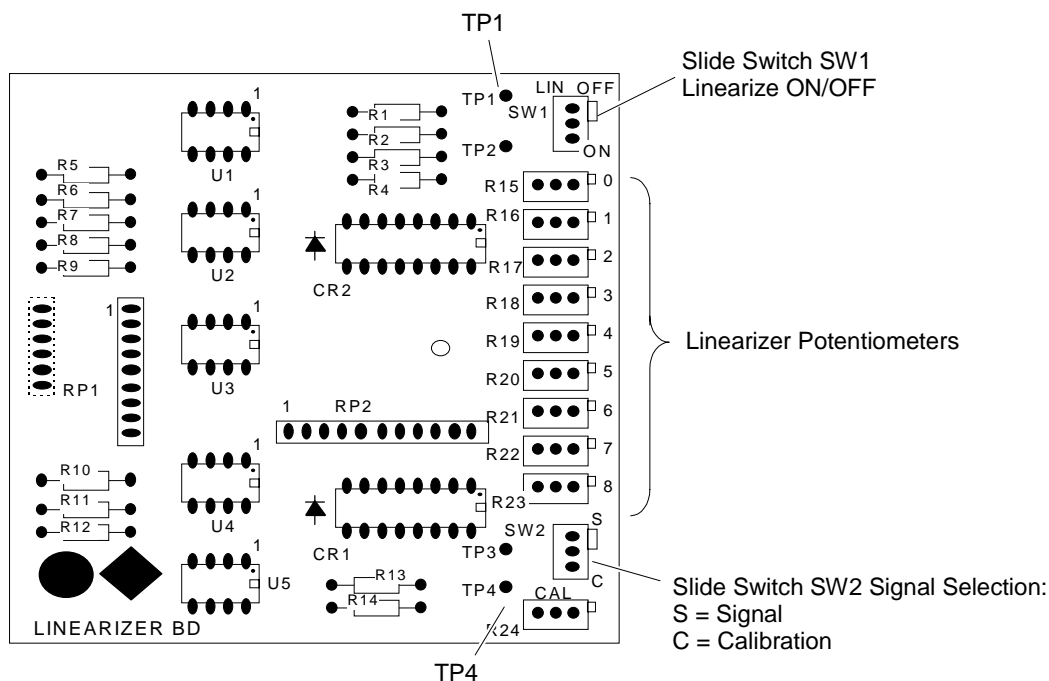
LINEARIZER BOARD ADJUSTMENTS
